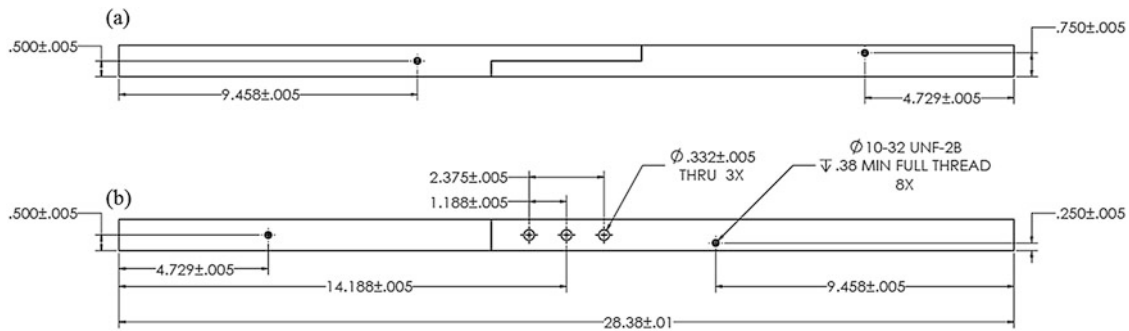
Standard 316 stainless steel Brake-Reuß beam (BRB): (a) Side view showing interface. (b) Top view showing lap joints
